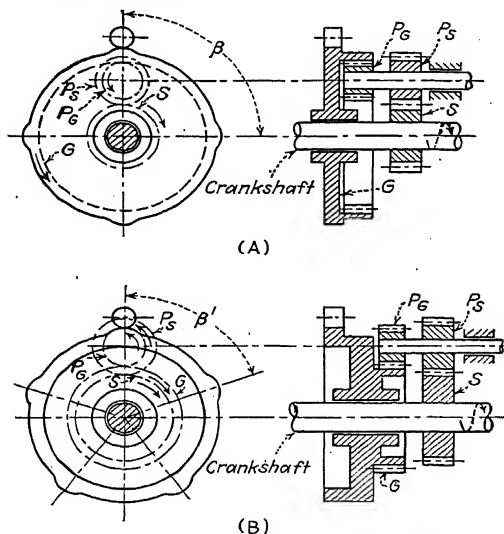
Schematic arrangement of usual cam-ring drives for radial engines. (A) For opposite rotation of cam ring and crankshaft. (B) For same direction of rotation of cam ring and crankshaft.
